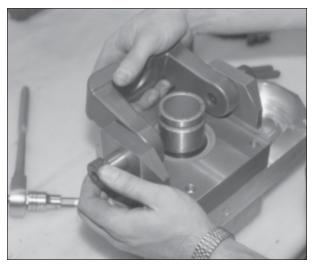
Install shoulder bolt through the latch extension into the hammer latch.
